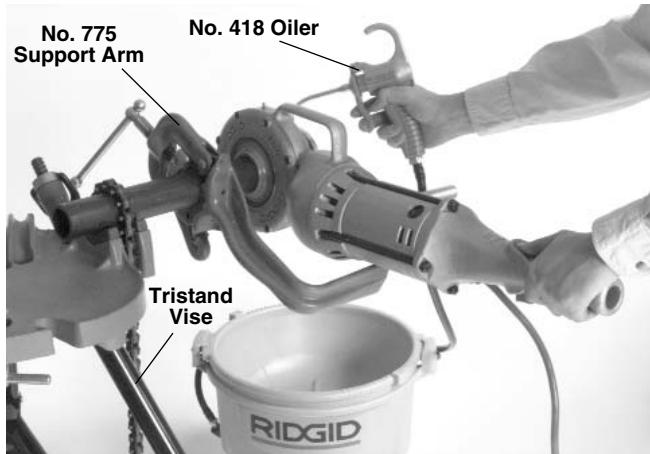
Threading 2" Pipe With Power Drive Positioned On Left Side Of Vise
